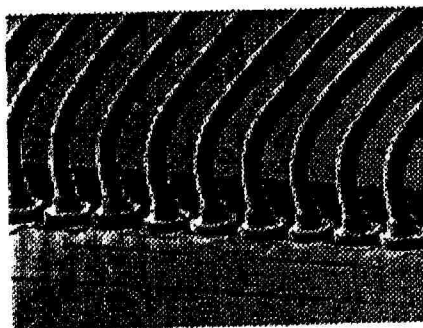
Wire Bond (A Picture Captured at Assembly Floor by Using Microscope)
